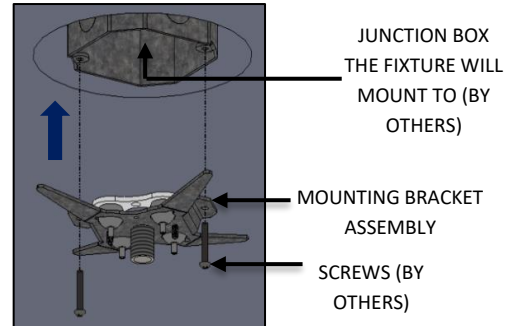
MOUNTING BRACKET ASSEMBLY INSTALLATION
